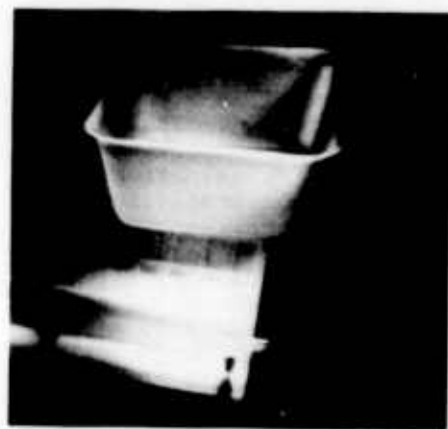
CLOSURE ASSEMBLED & READY TO POUR ENCAPSULANT
